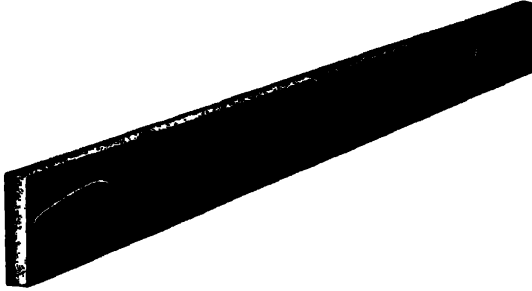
Steel Bar for Electric-Welded Joint
